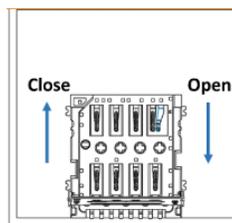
SIM Card Socket and Cover Open/Close Direction
